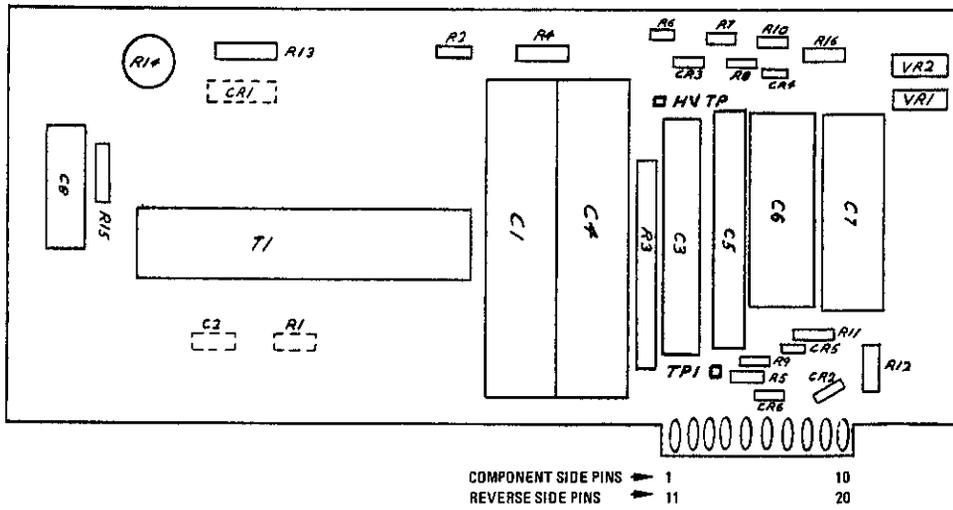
A. A3A26 High Voltage Assembly Parts Locations
